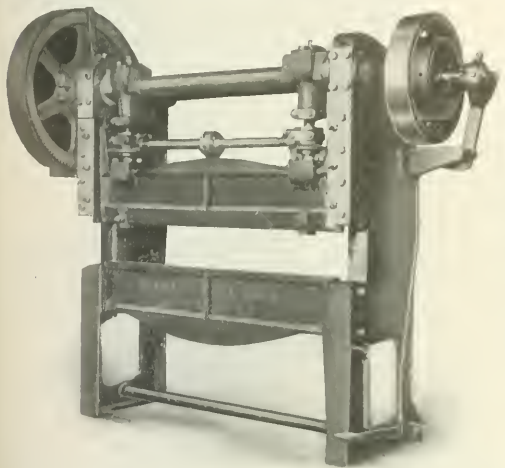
Niagara Forming Press for Use in the Manufacture of Sheet Metal Furniture
